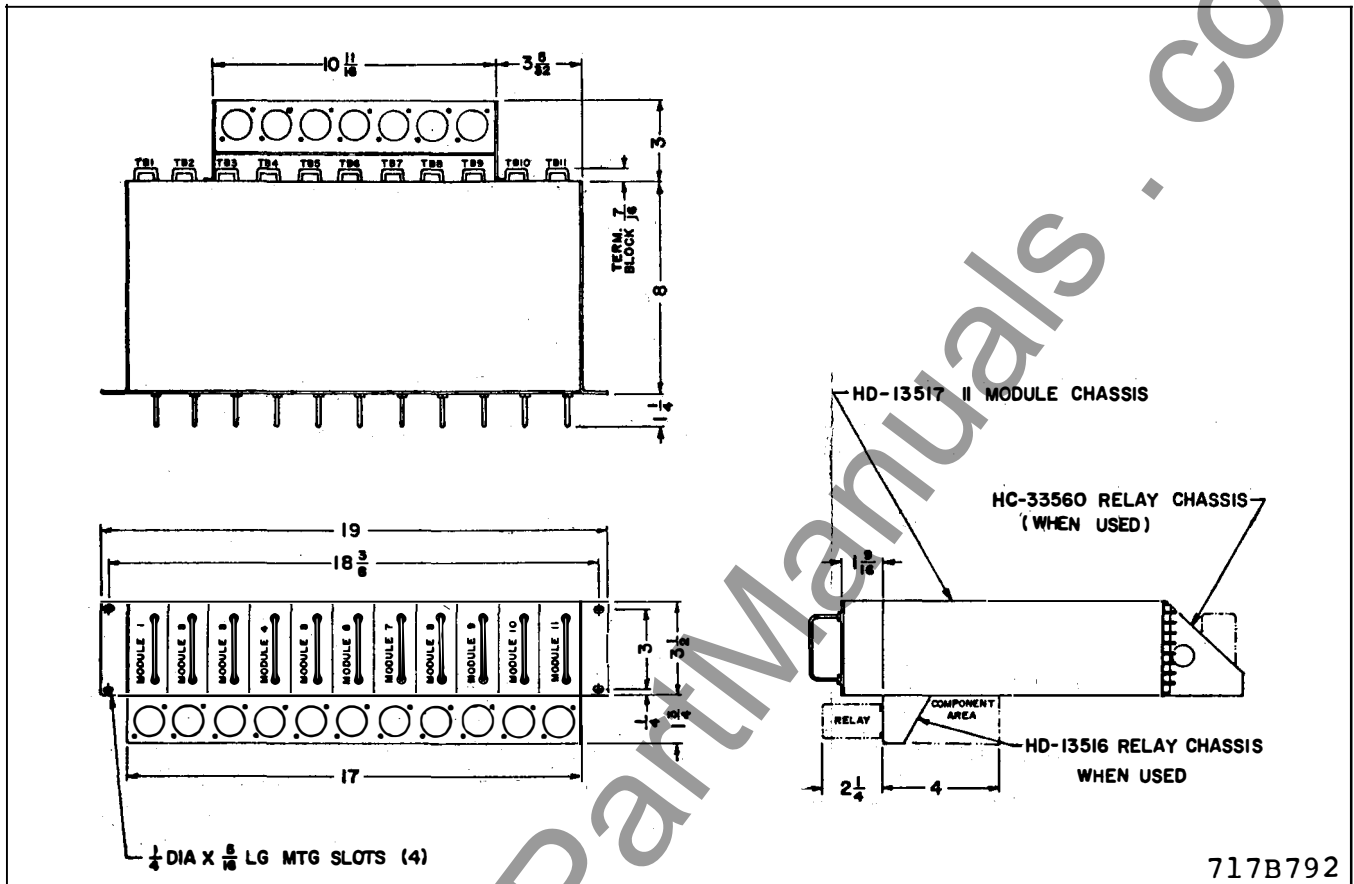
Outline and Drilling Plan of 11 Module Chassis
